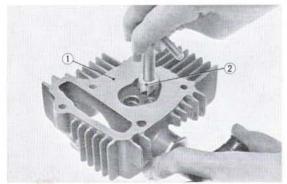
① Cylinder head ② Valve seat cutter
